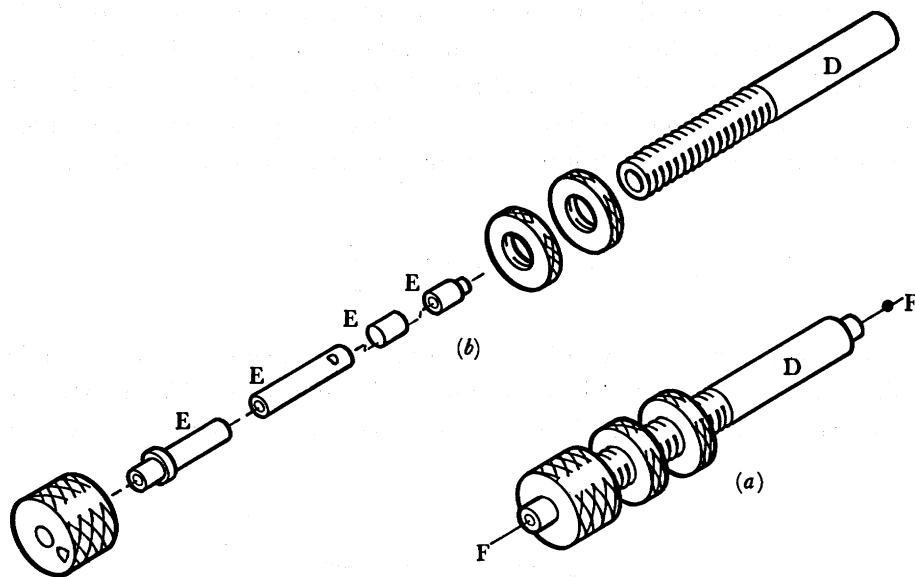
A schematic diagram (a) assembled and (b) exploded of the wire mountings. D are the stainless steel outers, E the ceramic inserts and F the ends of the gold wire, which pass through the mountings.
